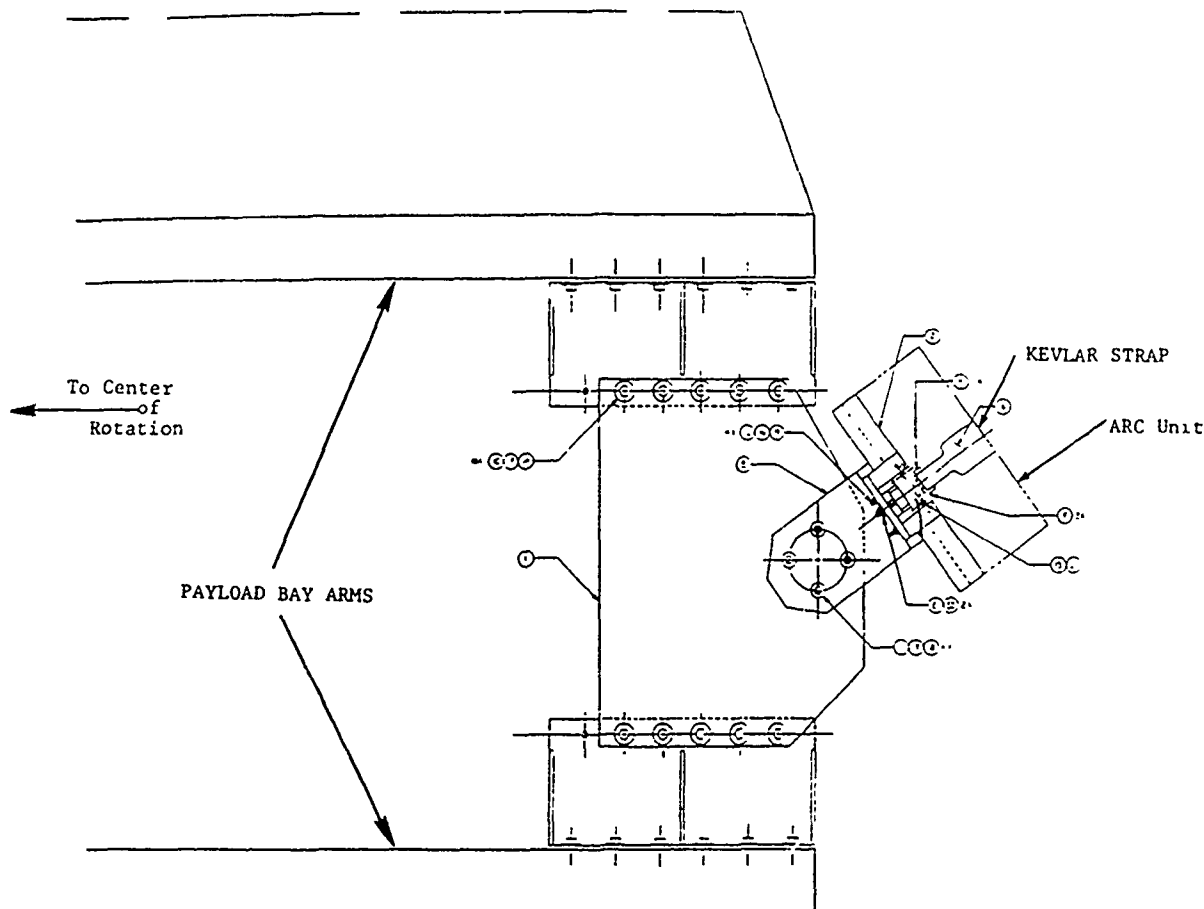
Plan View of Centrifuge Variable Angle Fixture
